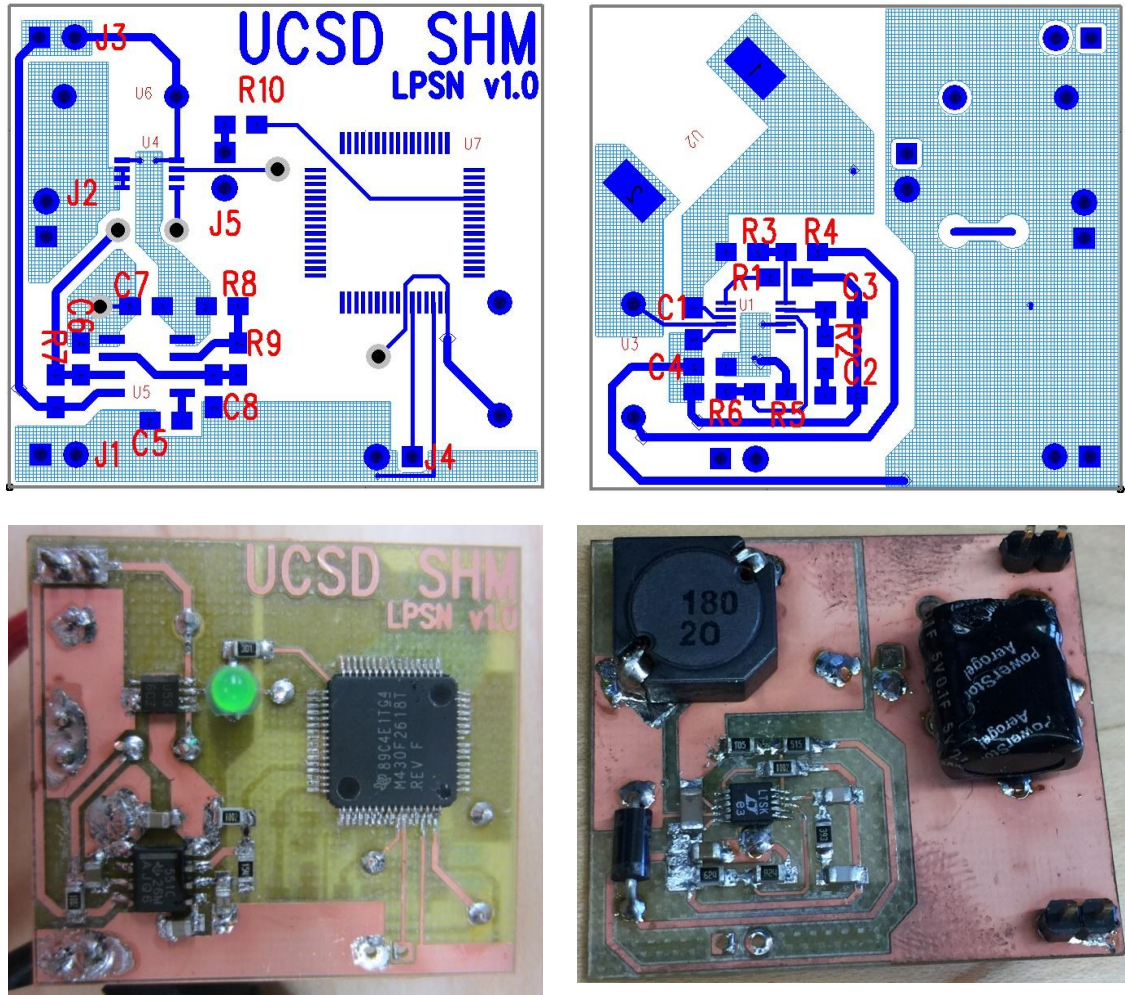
(top) layout diagrams of top and bottom layers, and (bottom) completed prototype top and bottom layers
